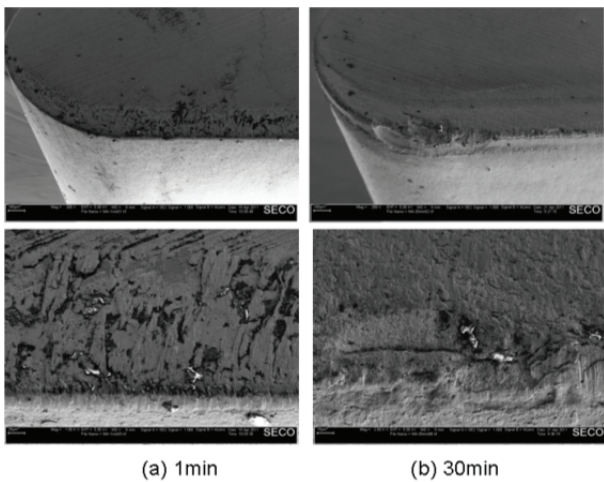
SEM view of the worn insert after milling Ti 6-4 MA (vc=40m/min, fz=0.15 mm/tooth, ap=2 mm)
